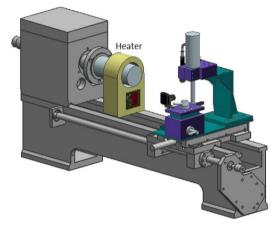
Heat resistance furnace with ultrasonic assisted equipment.
